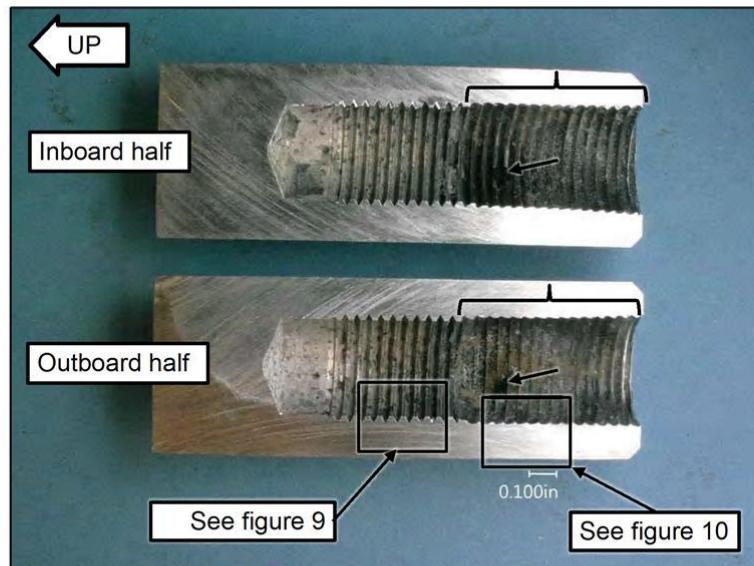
Direct view of the internal threads of the forward servo clevis rod after sectioning. Unlabeled brackets indicate the depth of worn threads, and unlabeled arrows indicate the locations of the inspection holes. Closer views of thread profiles in the boxed areas are shown in the figures indicated.
